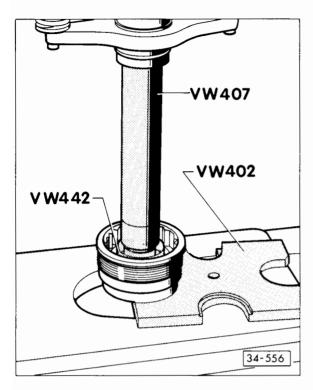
Pressing outer race/tapered roller bearing out of adjusting ring
